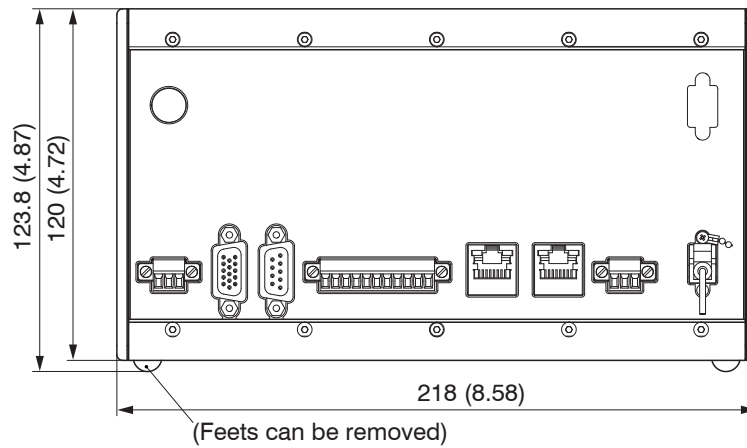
Dimensional drawing controller IFC2421, dimensions in mm
